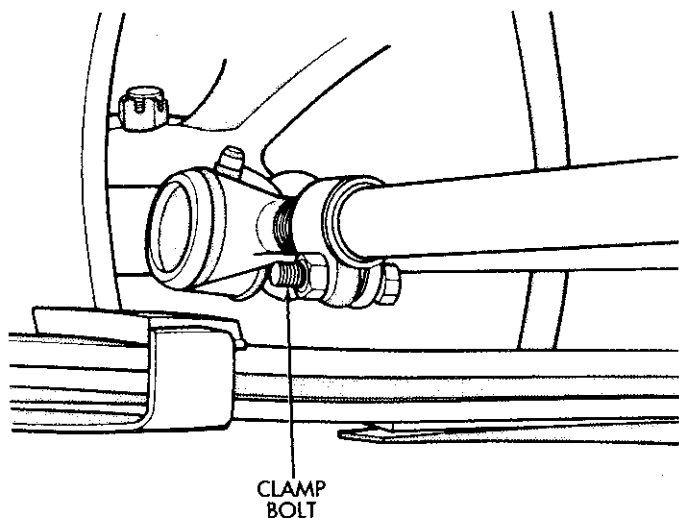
Tie Rod/Drag Link Clamp Bolt
